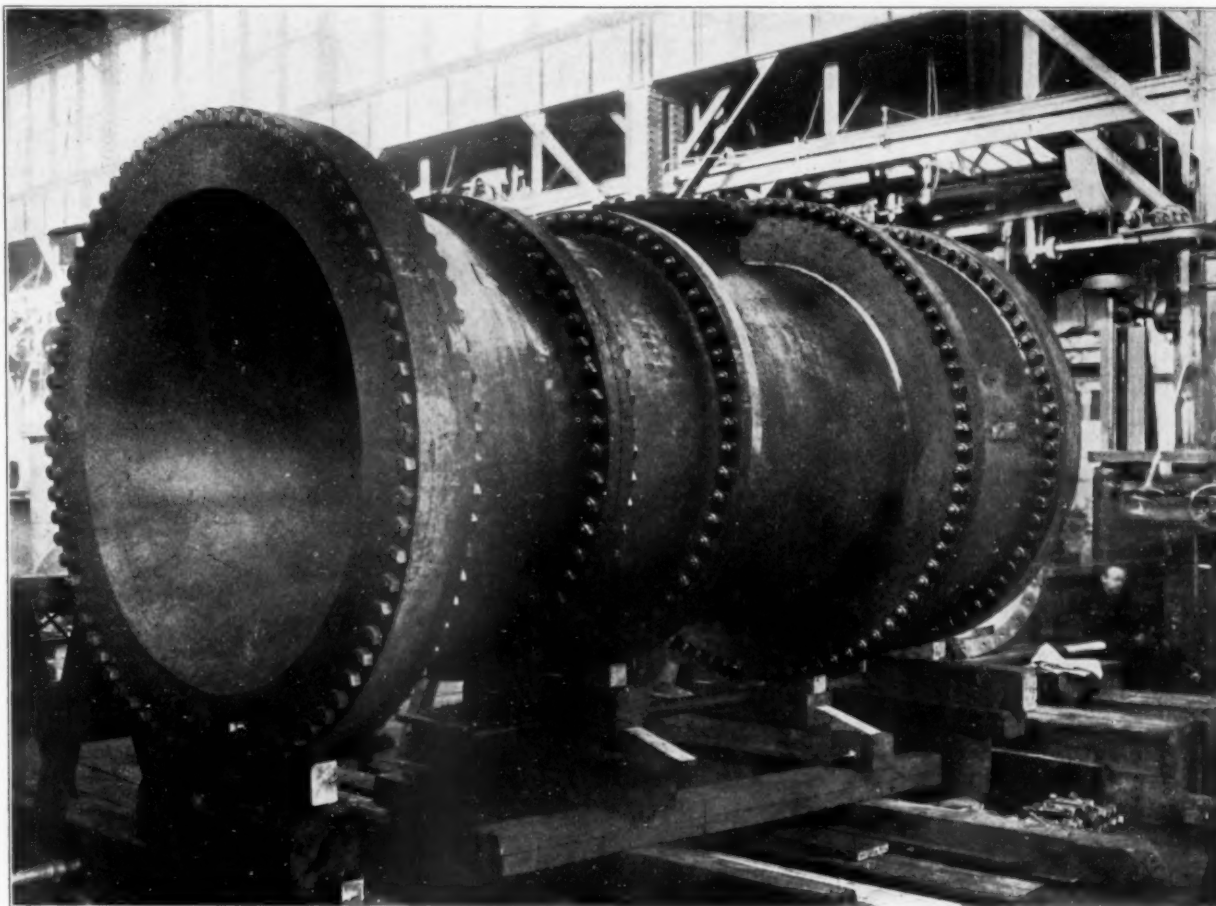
THE PARSONS MANGANESE BRONZE PIPE LINE CONSTITUTING AN EXPANSION JOINT FOR THE 66-INCH VALVE SHOWN IN FIG. 2.
